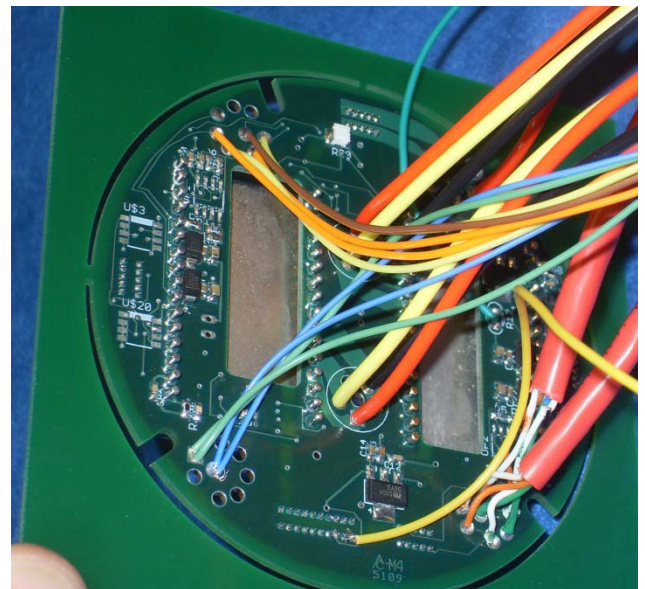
Bottom side of the motor driver board showing the cutouts for the heat sinks that pass through the board.
